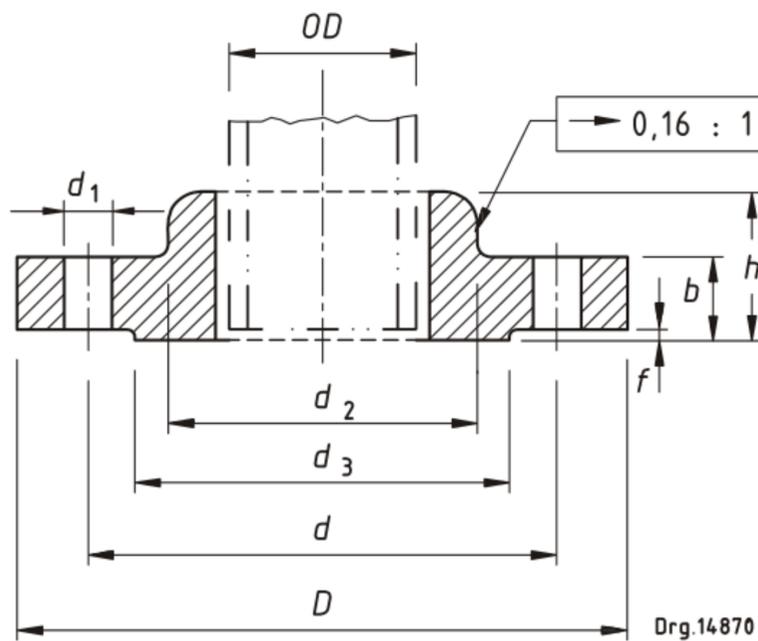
(e) — Type 5: Steel slip-on boss flange for welding
